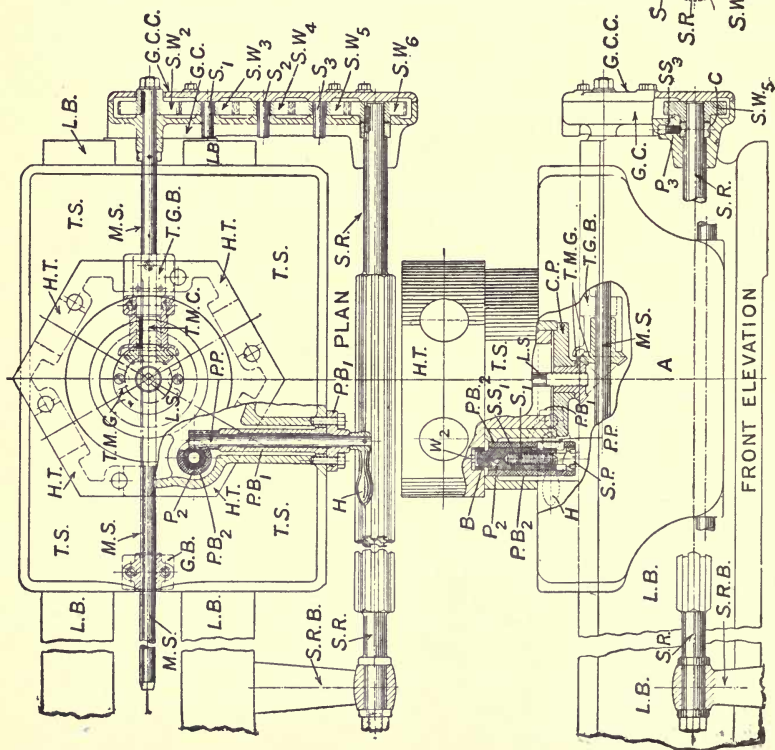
GENERAL ARRANGEMENT OF SADDLE AND TURRET FOR HEXAGON TURRET LATHE.
